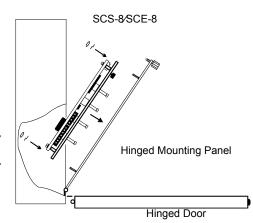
Mounting to ABS-4D Hinged Mounting Panel
